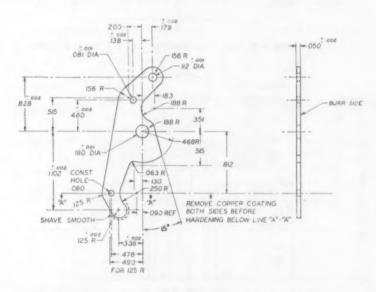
A. Arm of calculating count cam, which is notched, pierced, shaved and blanked on a 3-stage progressive die.
